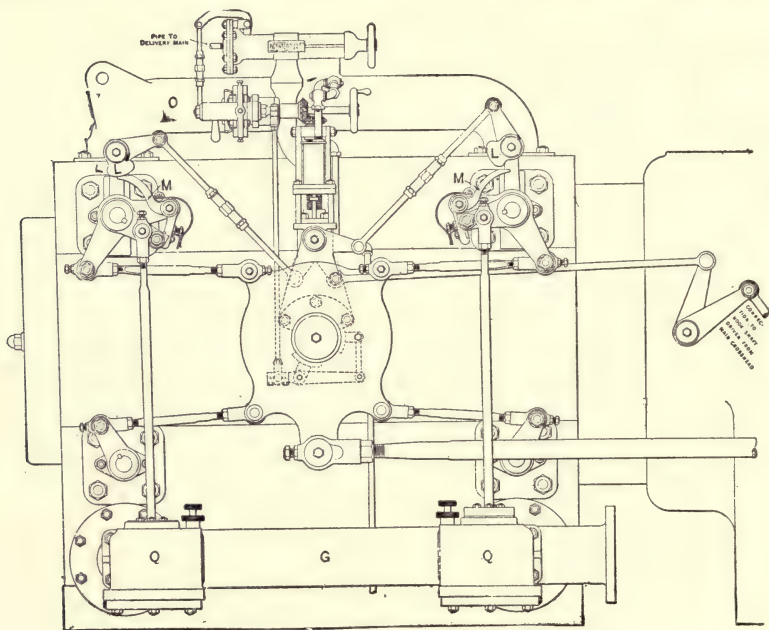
Valve Gear with Cut-off Controlled by Pressure Regulator.
